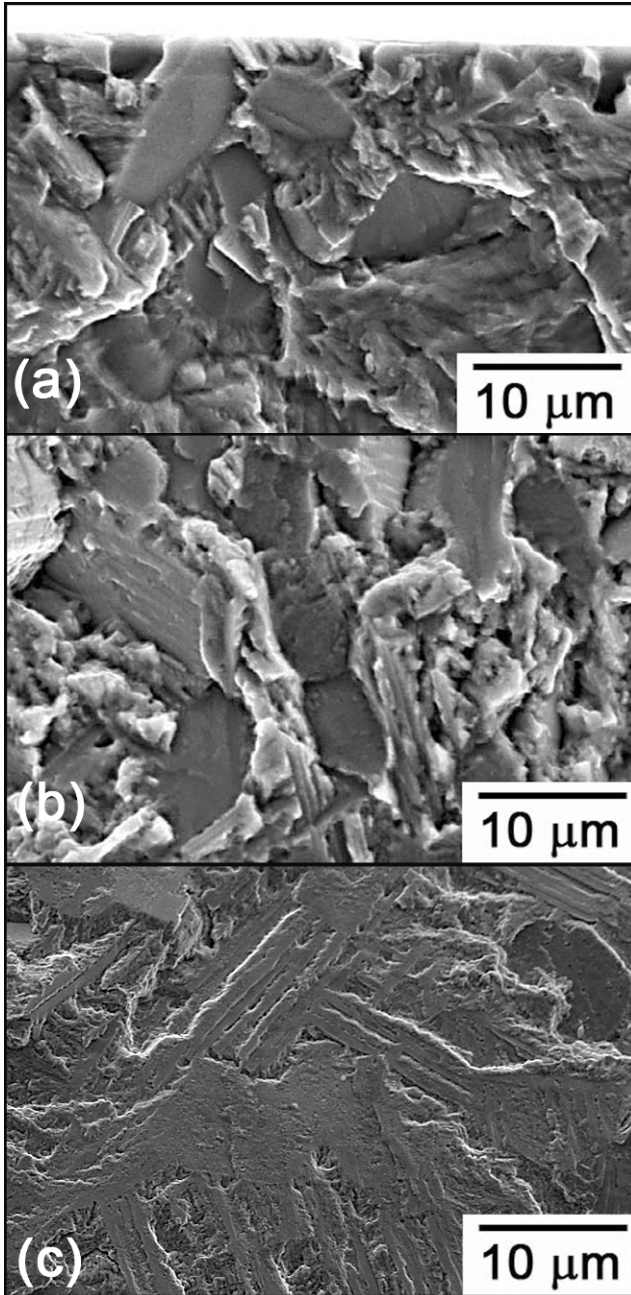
Fractographs displaying examples of the three types of fracture surfaces: (a) surface, (b) isolated subsurface faceting, and (c) macroscopically planar subsurface crack initiation sites.
